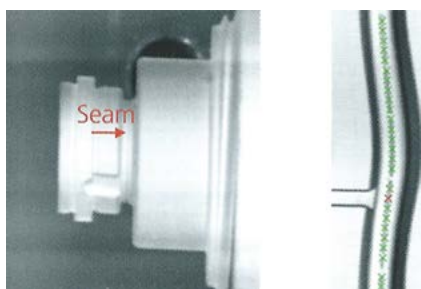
Example of a joint axis tracking system using back-scattered electrons during welding a pressure sensor [11]
